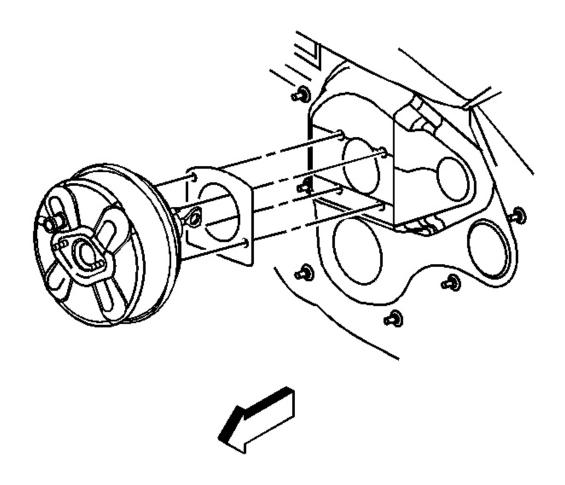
View Of Vacuum Booster Mounting Nuts, Gasket & Booster Assembly Courtesy of GENERAL MOTORS CORP.
